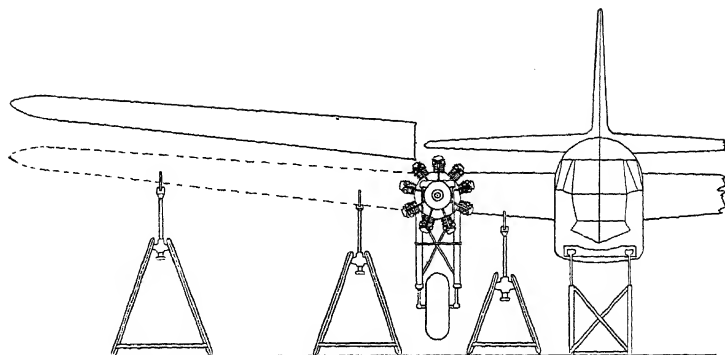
OUTER PLANE AND UNDERCARRIAGE ASSEMBLY.
